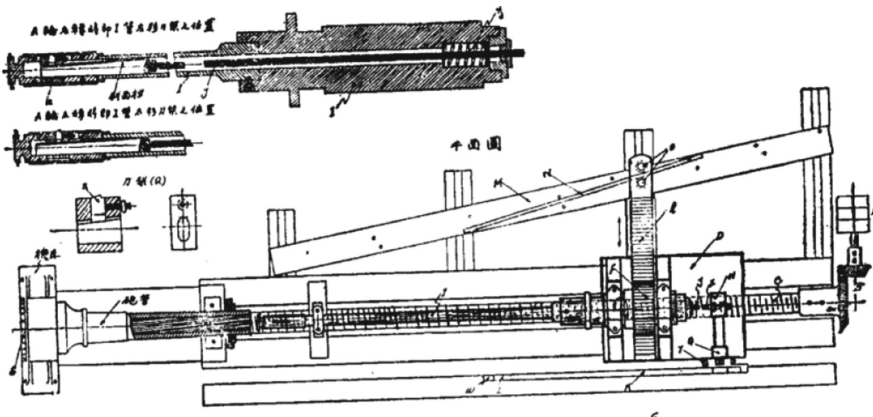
The Rifling Machine's Three-View Drawing by Shanghai Arsenal [10]
